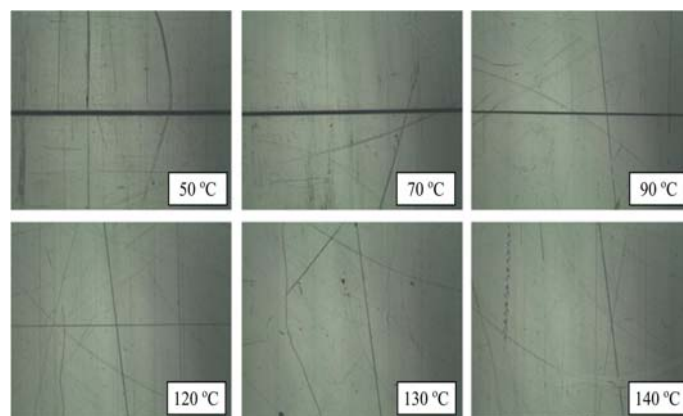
Micrograph of the weld marks or weld lines on the surface of the molded specimen under different cavity surface temperatures just before filling [47].
